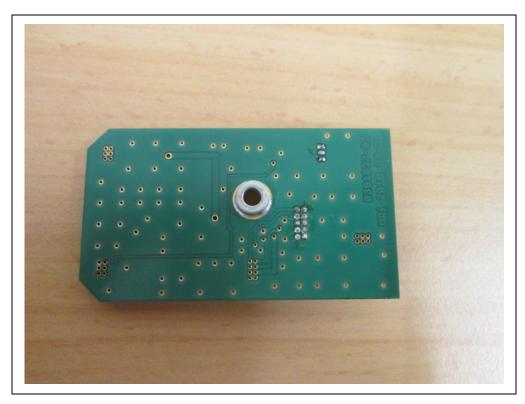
EUT, view of PCB 1 side 2 with connected sensor
